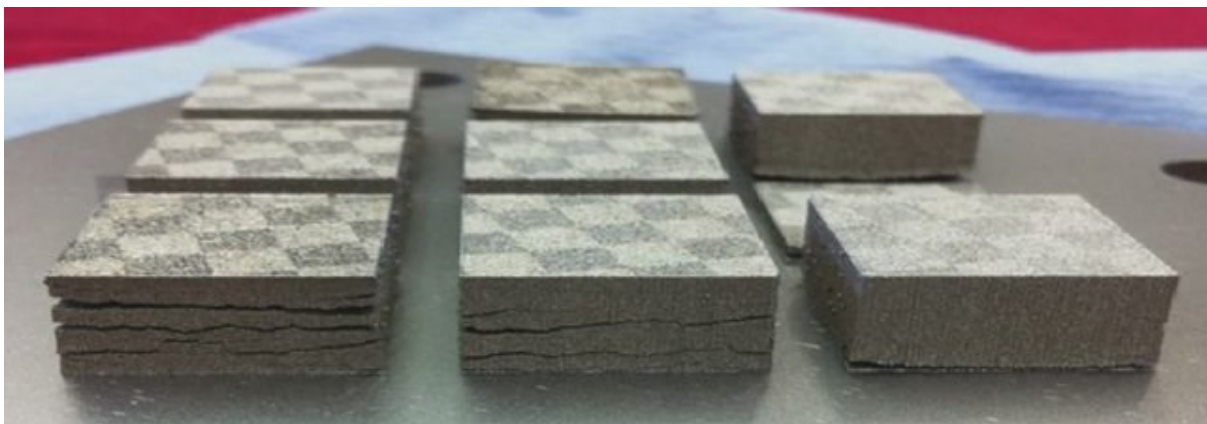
Cracks and delamination of M2 HSS parts produced by LPBF [54].
